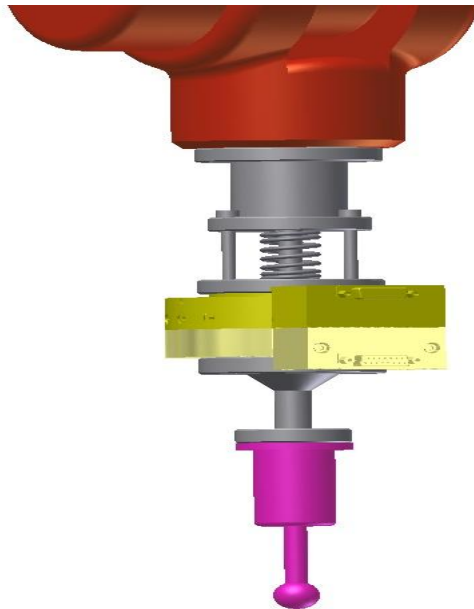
ROBOT – IDC – cutting tool –ATC System.
